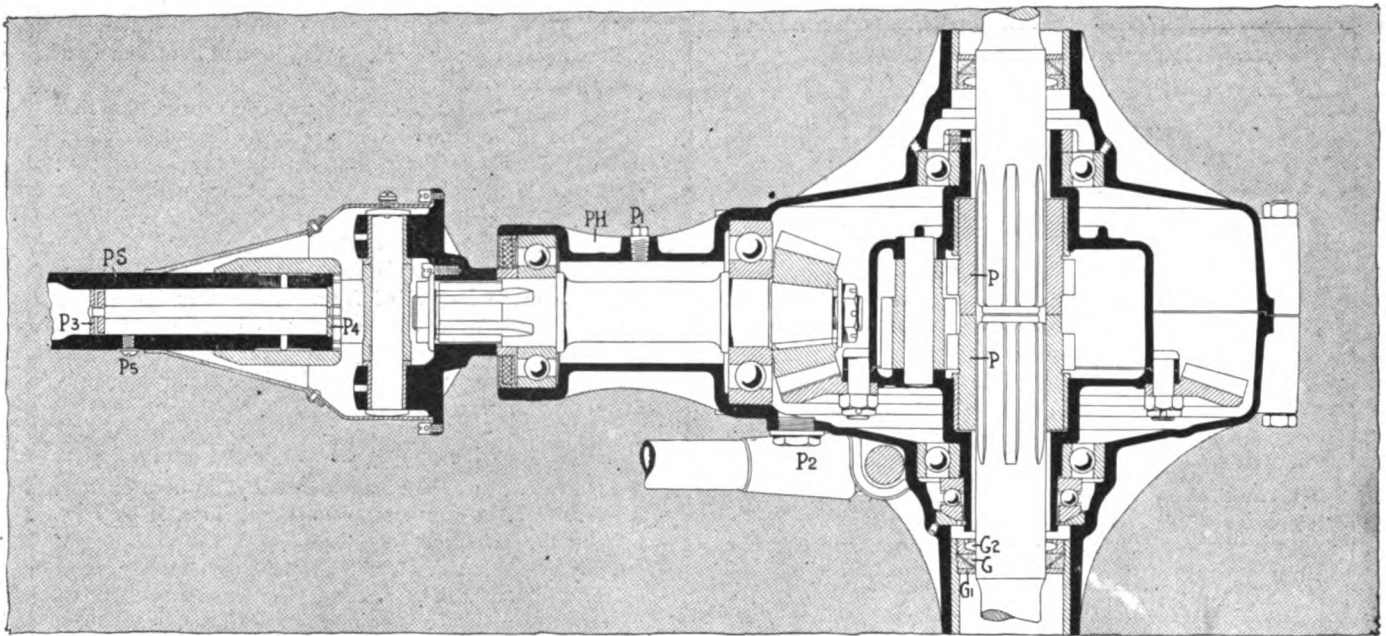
Horizontal cross-section through end of propeller shaft and differential gearset
